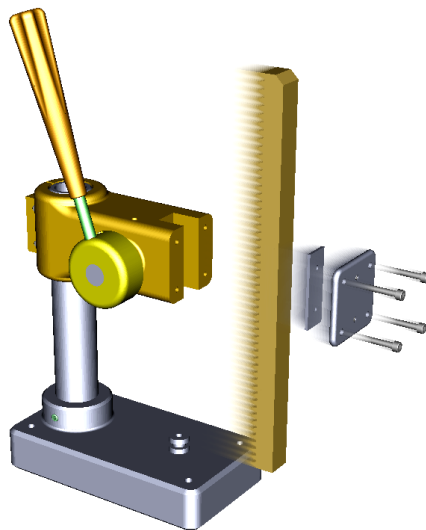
Explosion diagram representing a disassembly procedure for a disassembly problem. Static motion blur is applied to convey how each individual part is removed.
